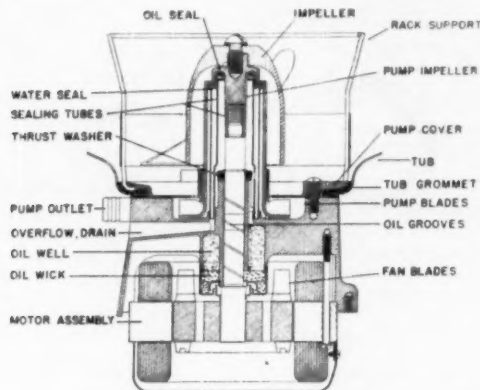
MOTOR, PUMP, AND IMPELLER ASSEMBLY FOR DISHWASHER
